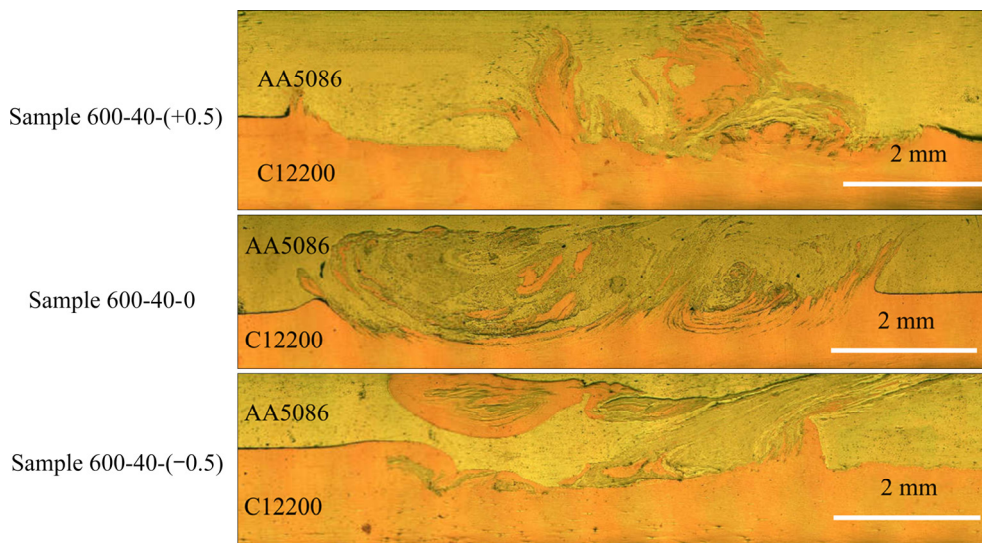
Cross-sections of welded specimens with different overlaps
